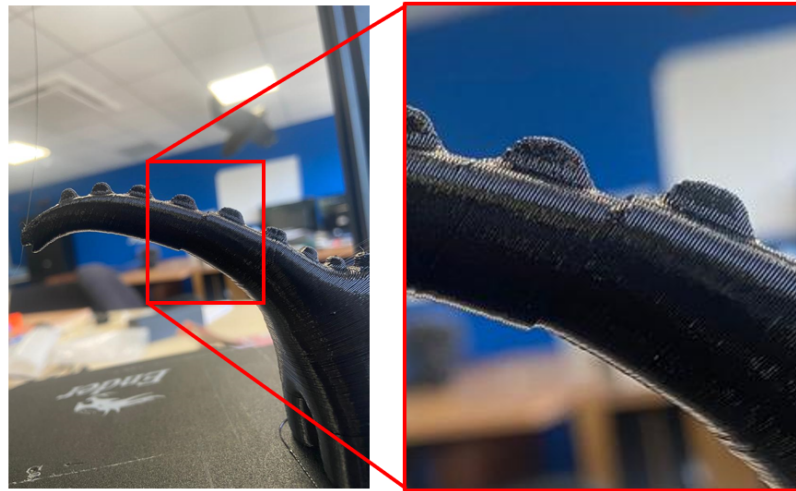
Layer shift in dinosaur print at roughly $B=-45^\circ$, caused by backlash in gear drive
